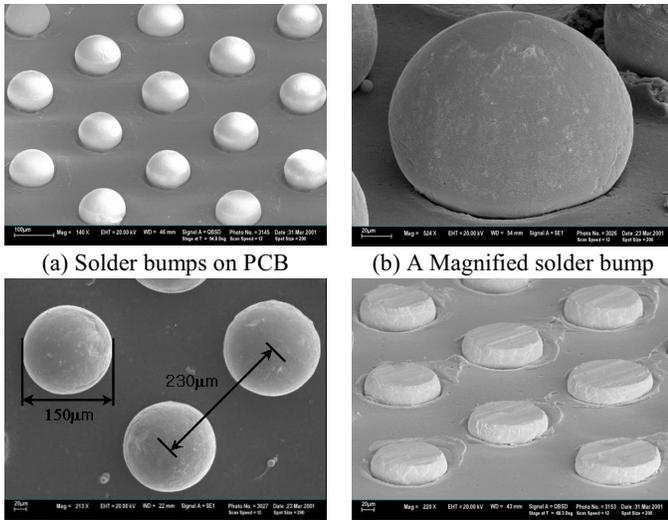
SEM images of screen printed solder bumps on PCB and coined solder bumps.
